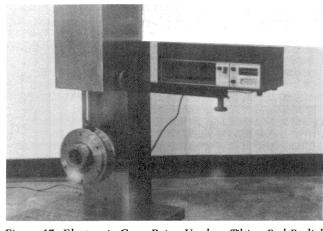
Electronic Gage Being Used on Tilting Pad Radial Bearing with Adjustable Spherical Ball and Seat Pads.
